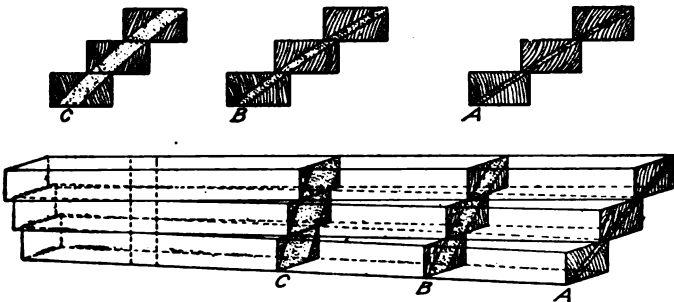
Method of Fitting Blocks from Which Propeller is Shaped
